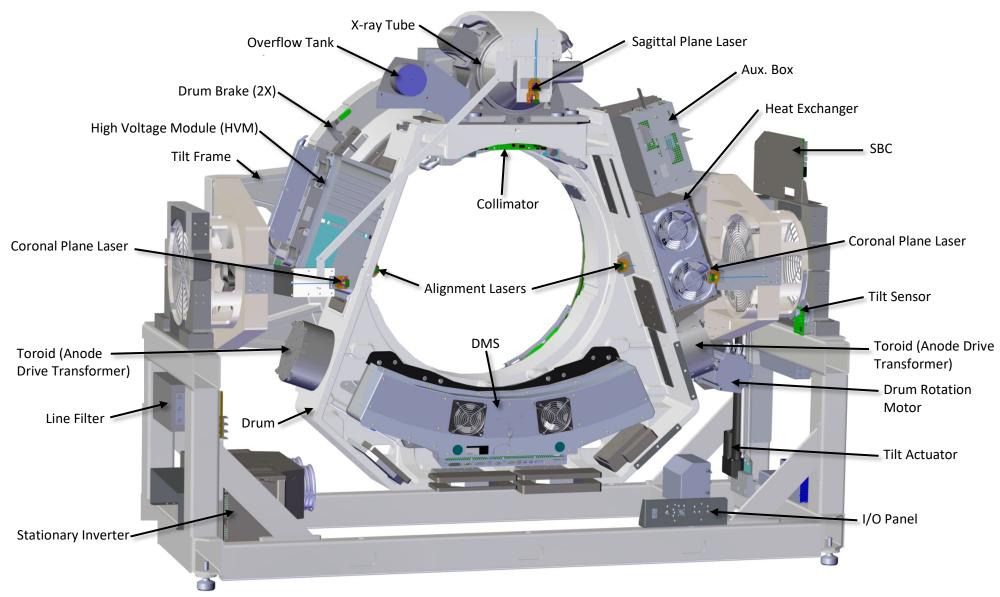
FRONT VIEW - Covers Removed (tilting system)
